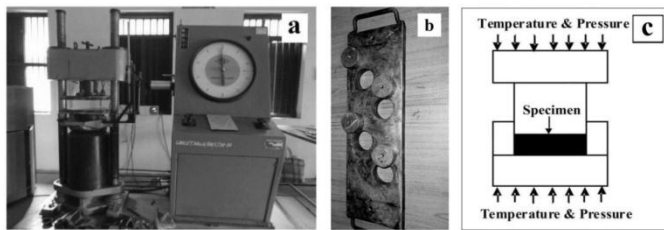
(a) Photograph of hydraulic compression machine with dies fixed on its table and crosshead, (b) photograph of intermediate die with mold cavity and punch set and (c) manufacturing procedure of specimens.
